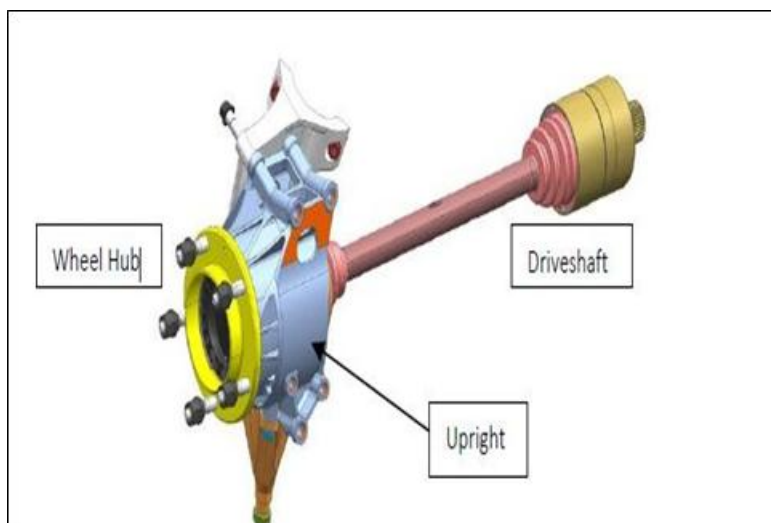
Complete Wheel Hub, upright and driveshaft.
